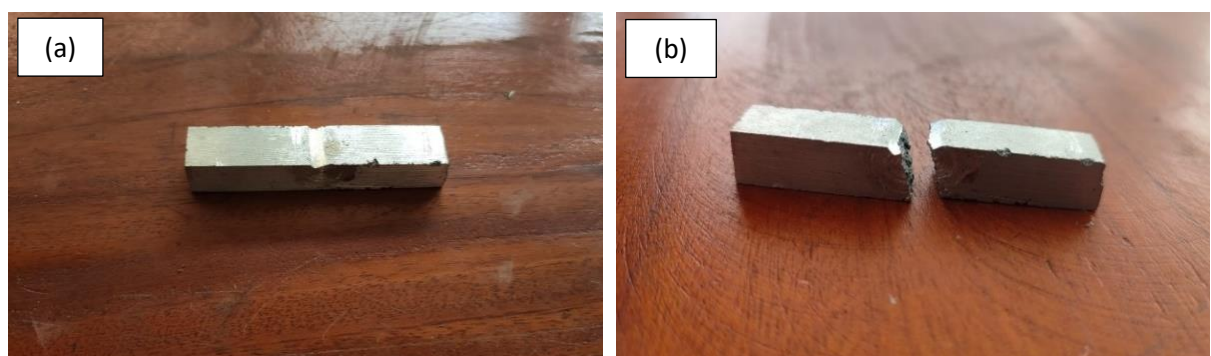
V-notch Impact test specimen (a) Before the impact test (b) The fractured surface after impact test
